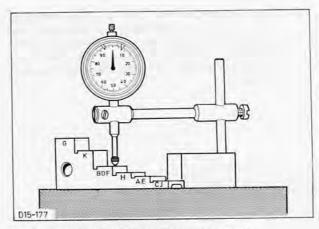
Zero the dial indicator using setting gauge 15–008–03B
